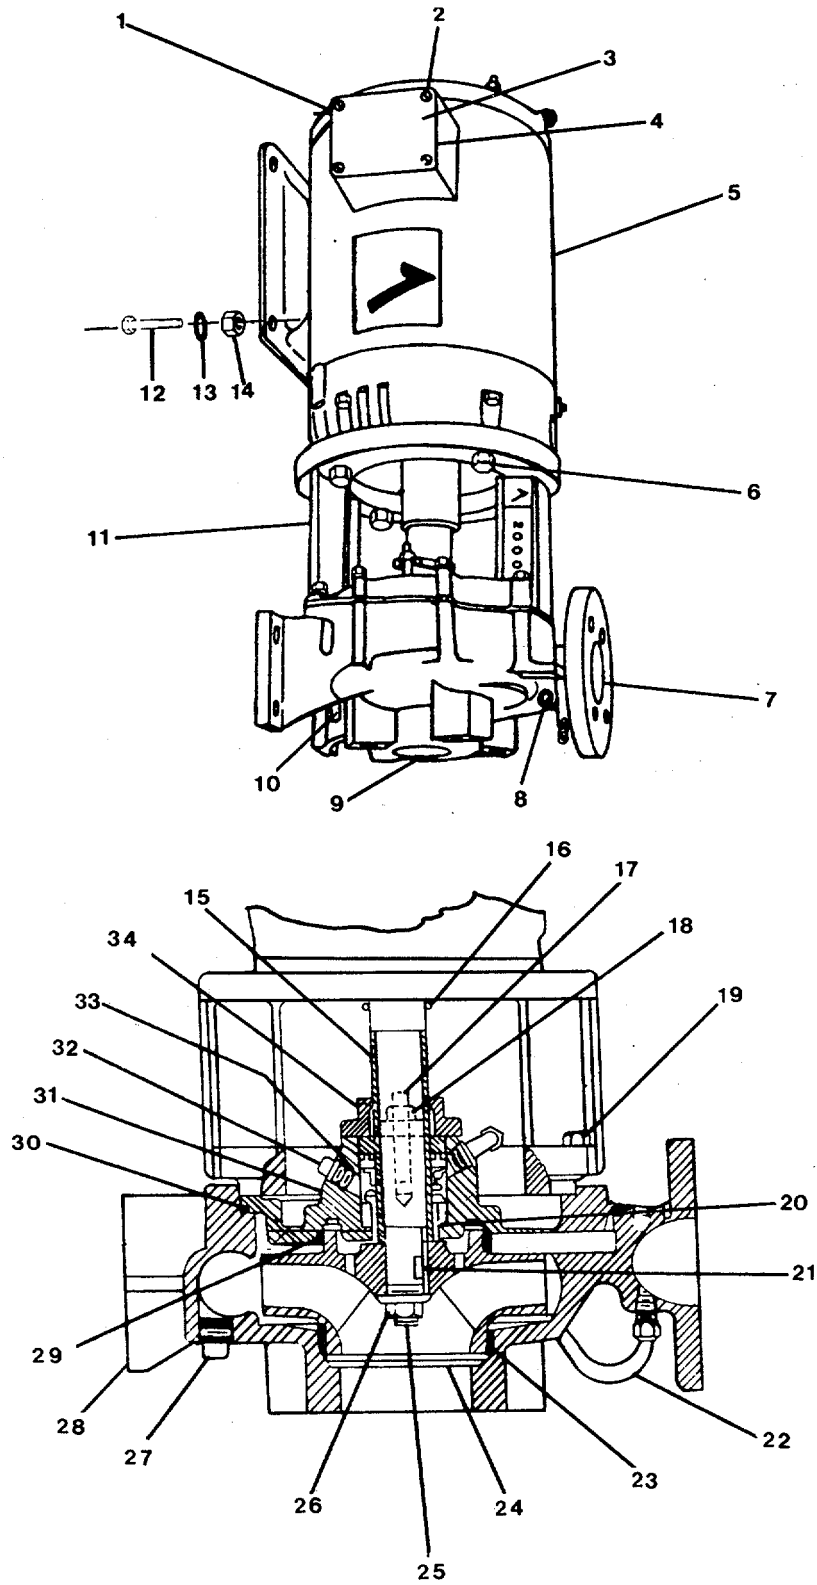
Bilge/Ballast Pump Assembly.
